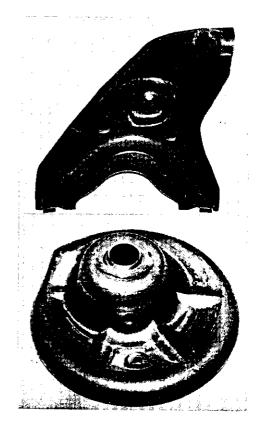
Examples of formed automotive parts using high strength hot rolled steel sheets:
